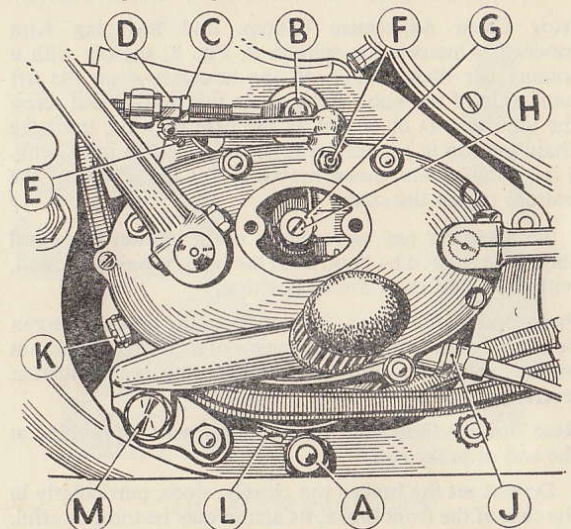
Clutch and front chain adjustment (swinging arm models only)
